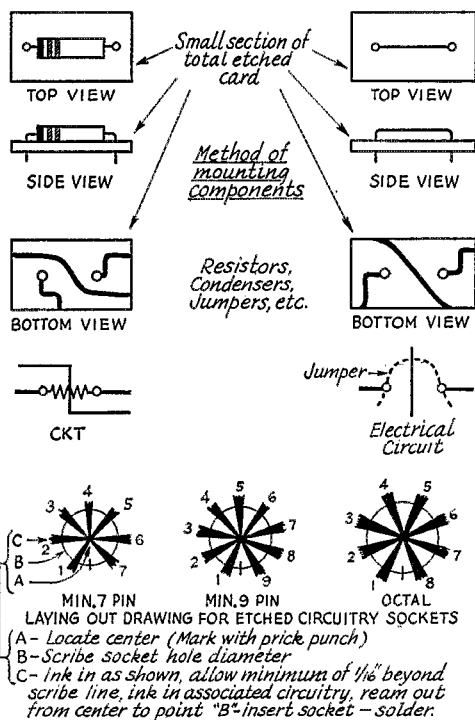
Samples of layout techniques such as jumpers, crossovers, eyes and components.
